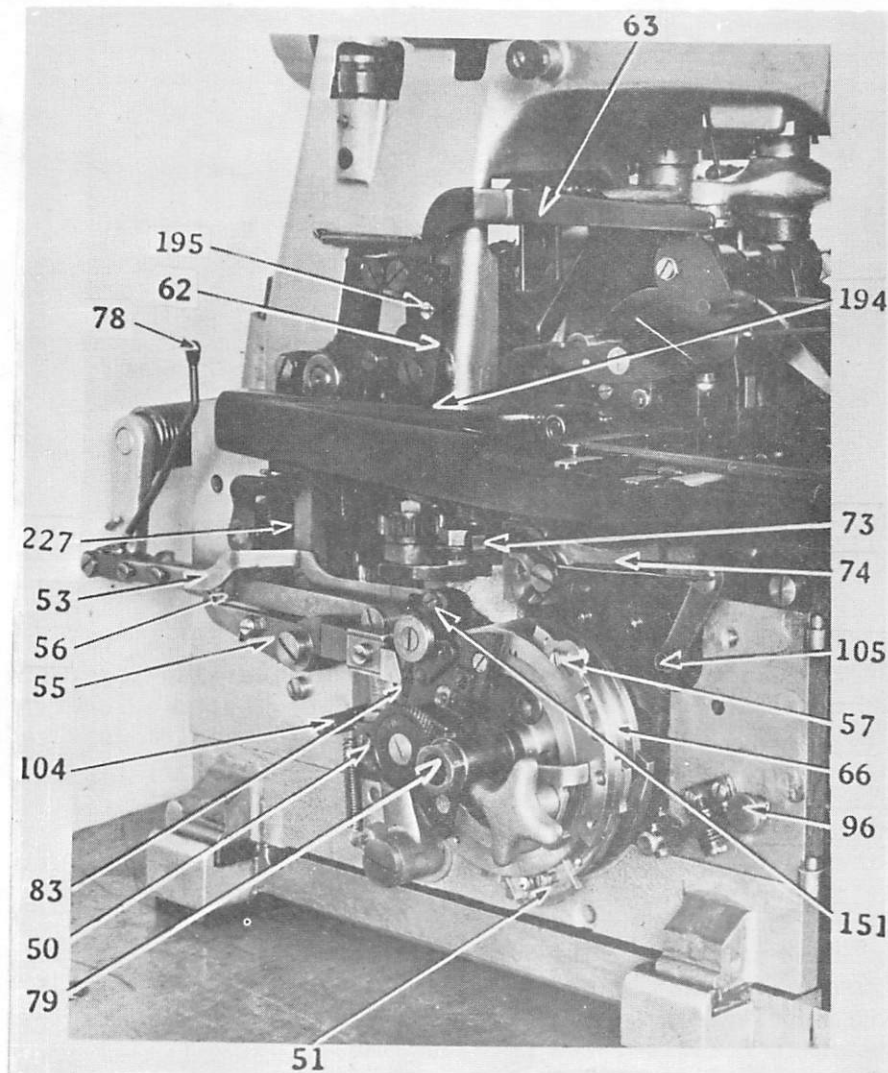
View of Pattern Wheel and Sewing Mechanism
